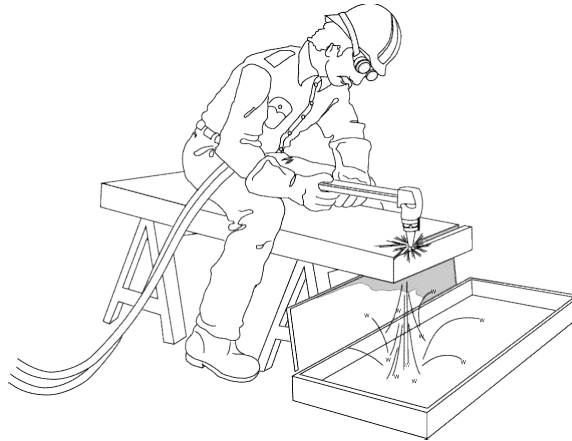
Protect feet and legs from sparks and metal that is being cut off.
